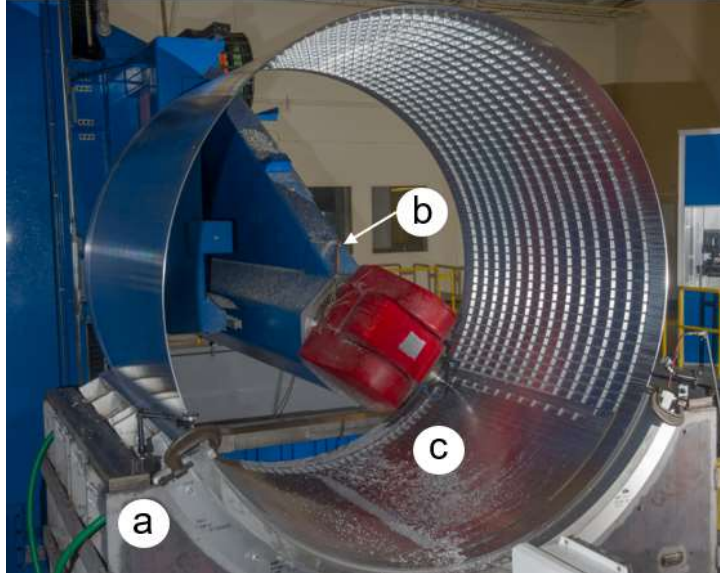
STA8.1 in the process of machining on the 7-axis milling machine: a, vacuum chuck; b, 7-axis milling machine; and c, machined test article.
